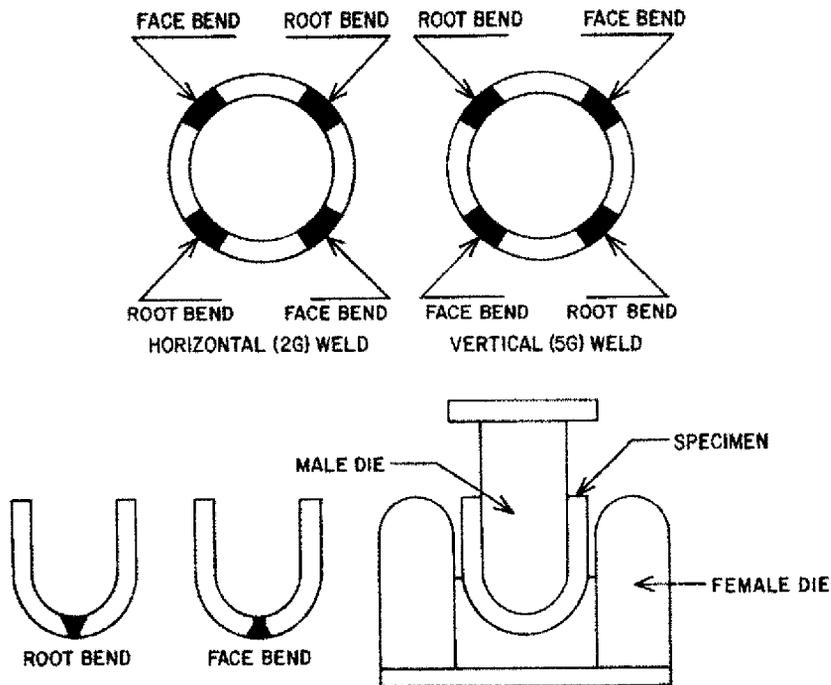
Bend test specimens for qualifying the pipe welder. The weld must bend 180 degrees without breaking.
